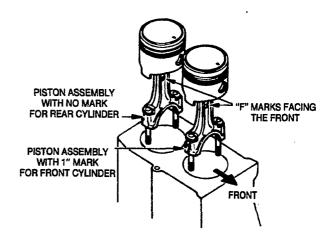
DIRECTION OF ROD INSTALLATION
